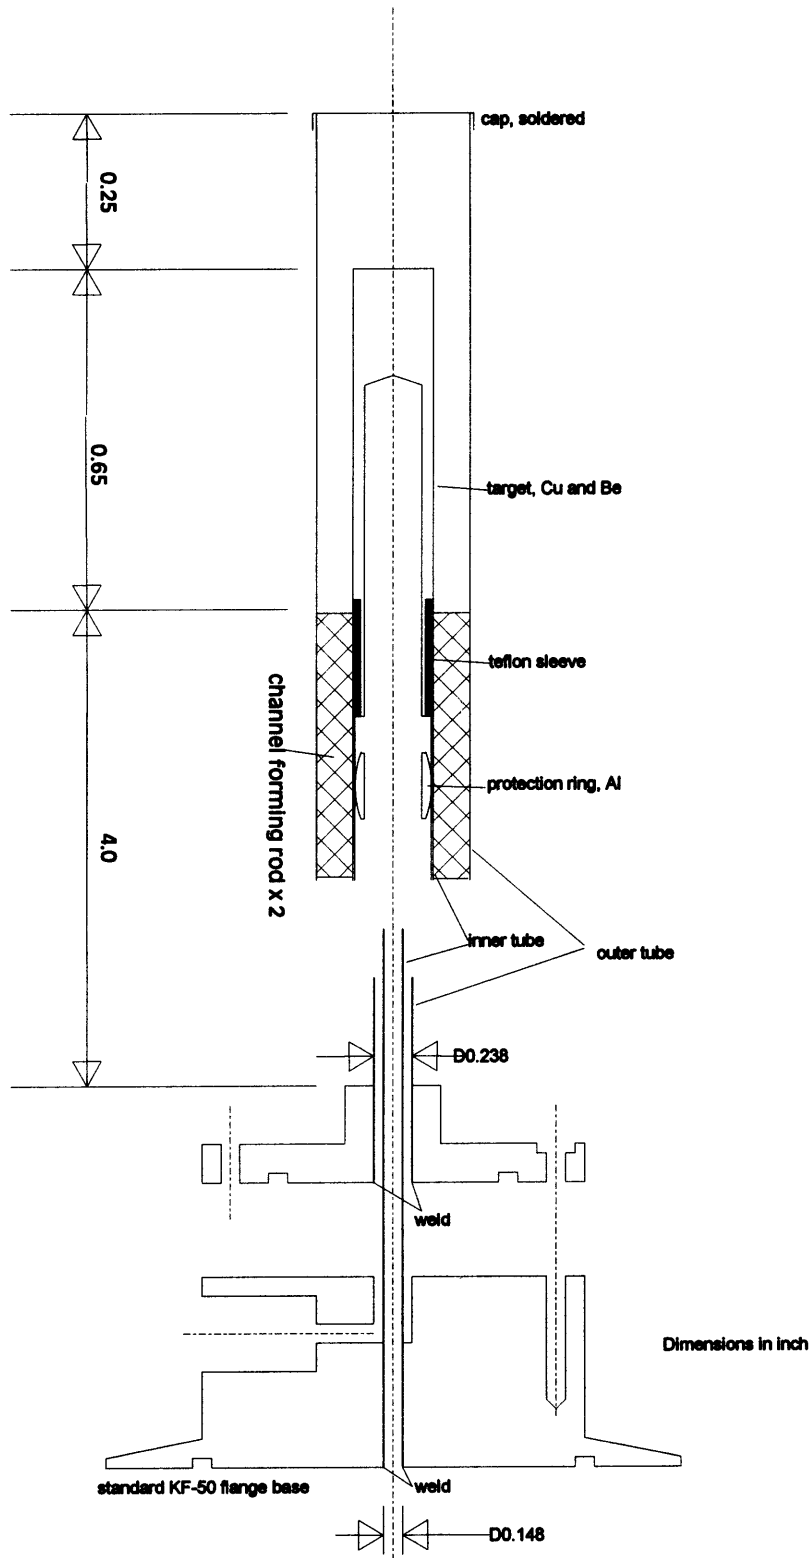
b. Needle tube Prototype II. The inner and outer tubes.
